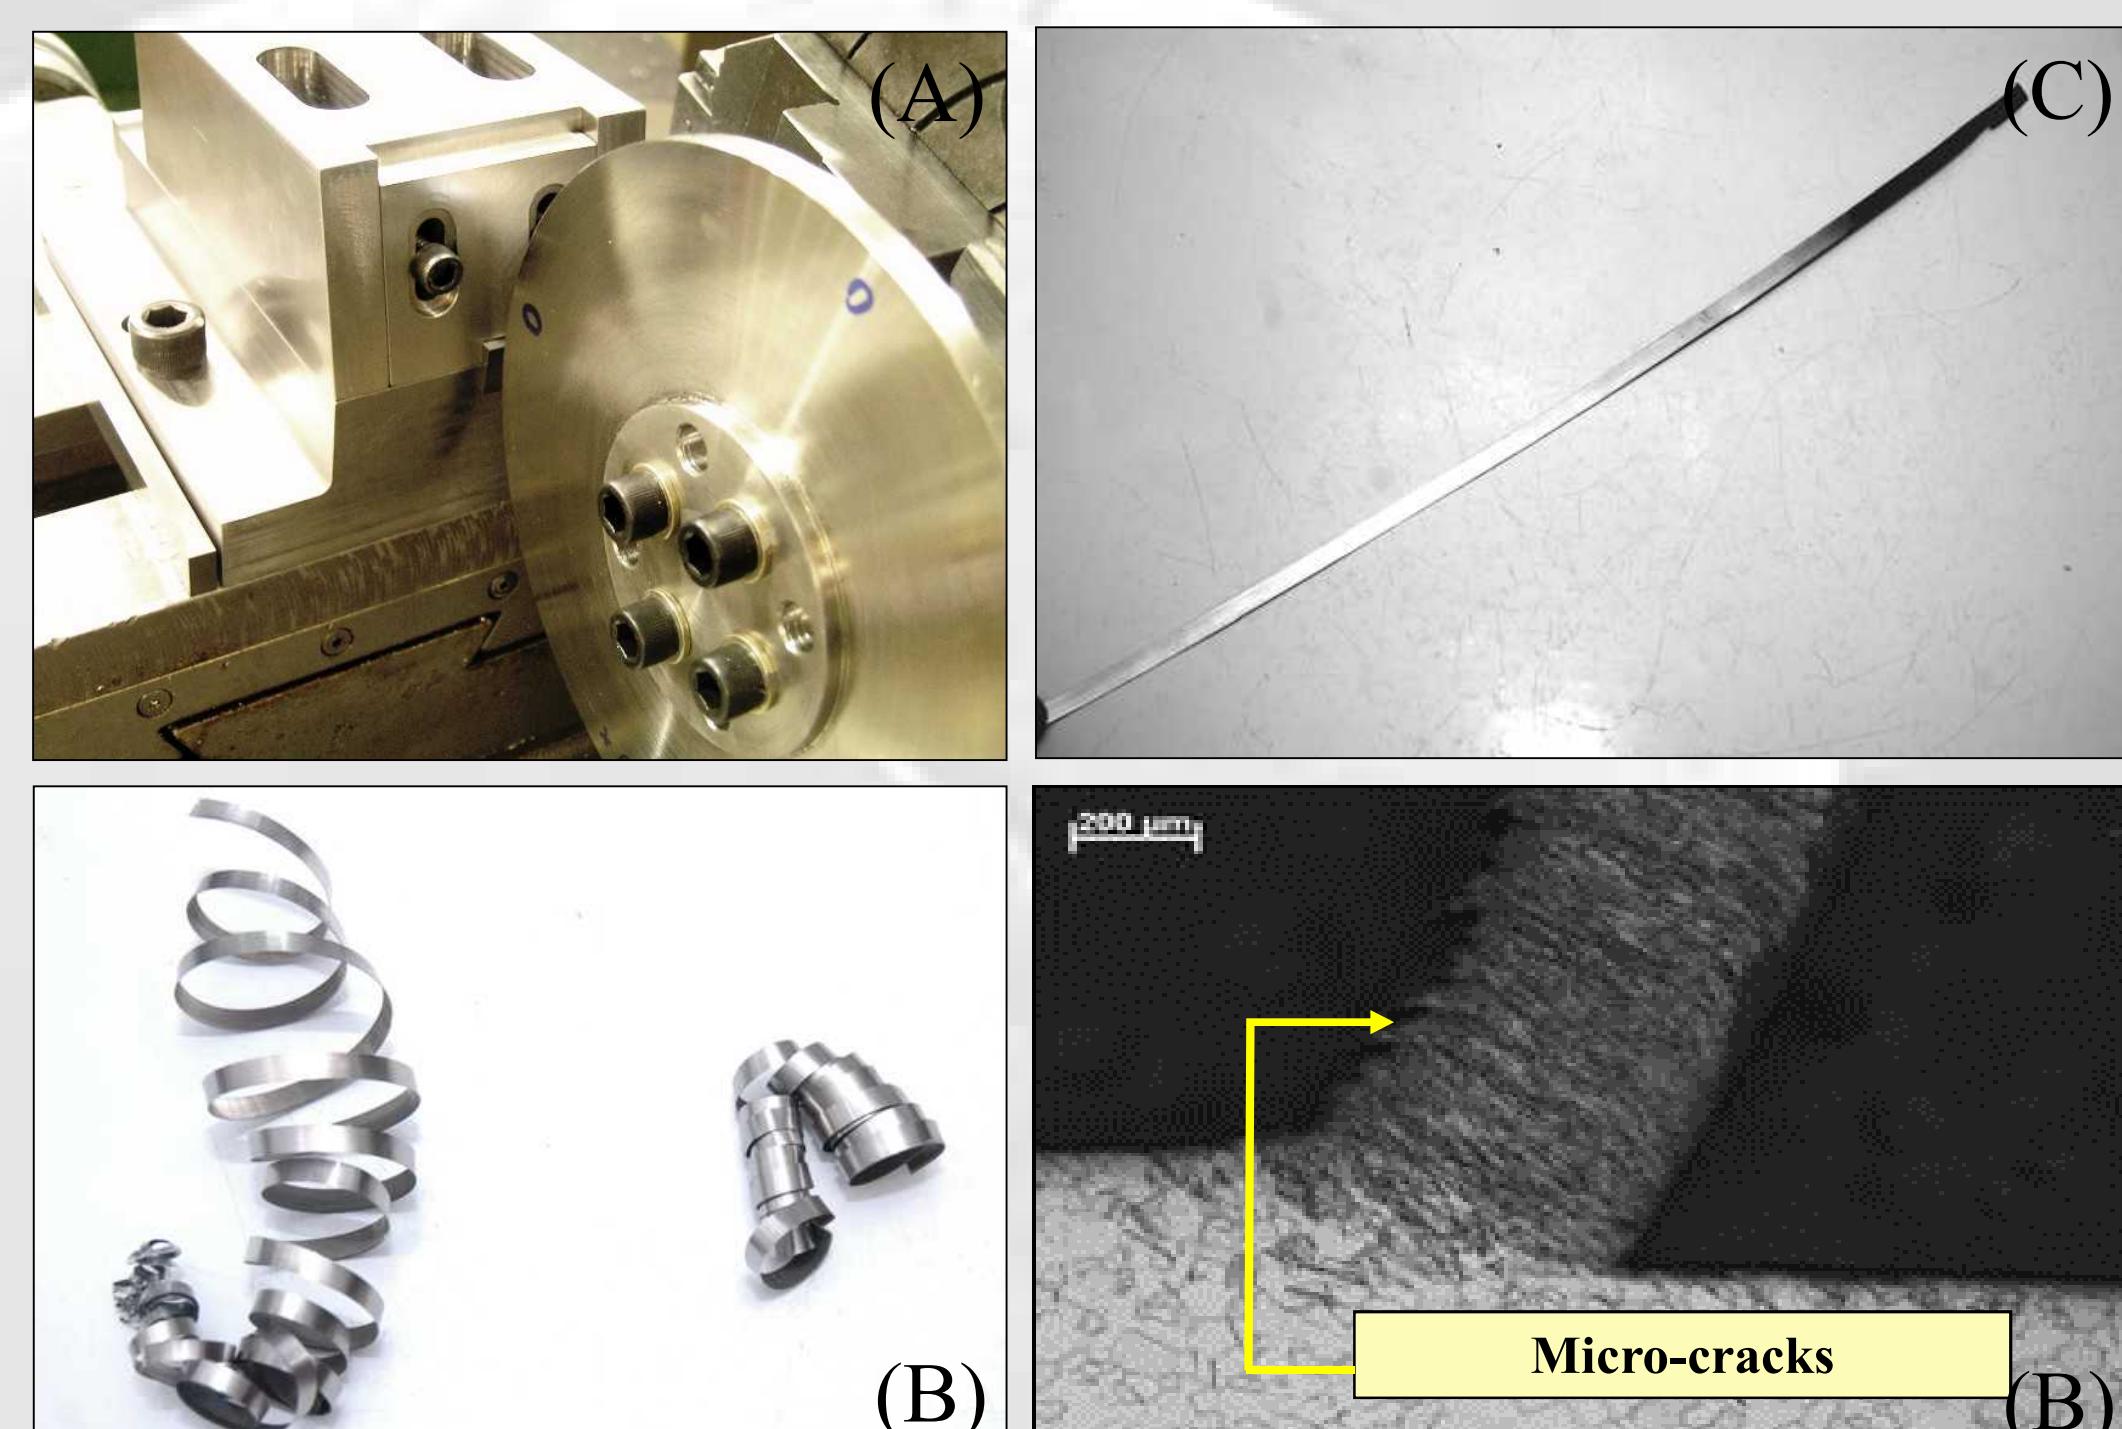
Photographs of (A) extrusion-cutting, (B) free machine chip, and (C) extruded foil.
